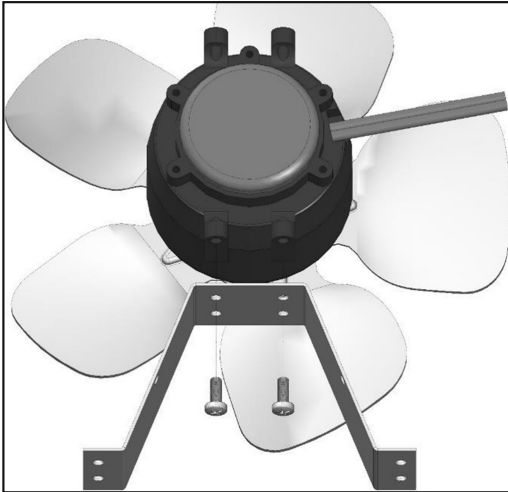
B.10.3.1a Remove Fan Mounting Bolts
